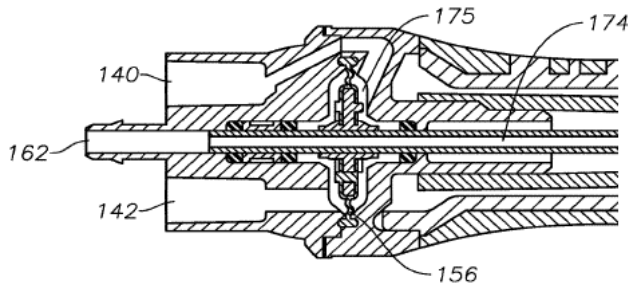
Schematic drawing of a dual actuated diaphragm mechanism. Components: 140 = pressurized air inlet backward movement, 141 = pressurized air inlet forward movement, 156 = diaphragm, 162 = connection to vacuum source, 174 = lumen inner cutting needle, 175 = air chamber. Adapted from: [24]
